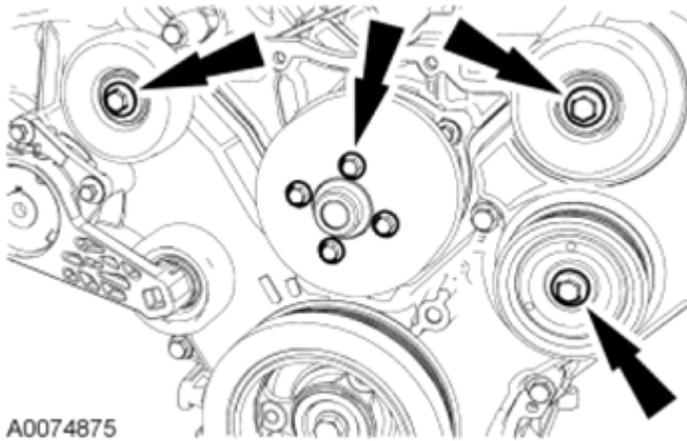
Locating Coolant Pump Pulley And Accessory Drive Belt Idler Pulley Bolts
